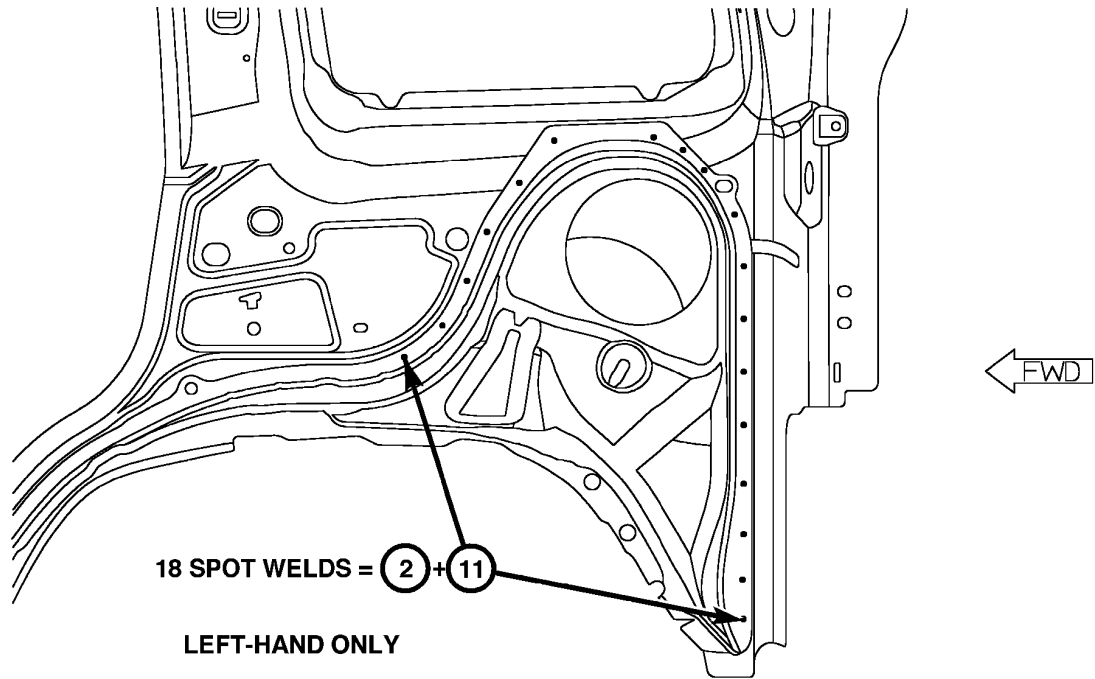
D-PILLAR AND TAIL LAMP ASSEMBLY WELD AND ADHESIVE LOCATIONS
